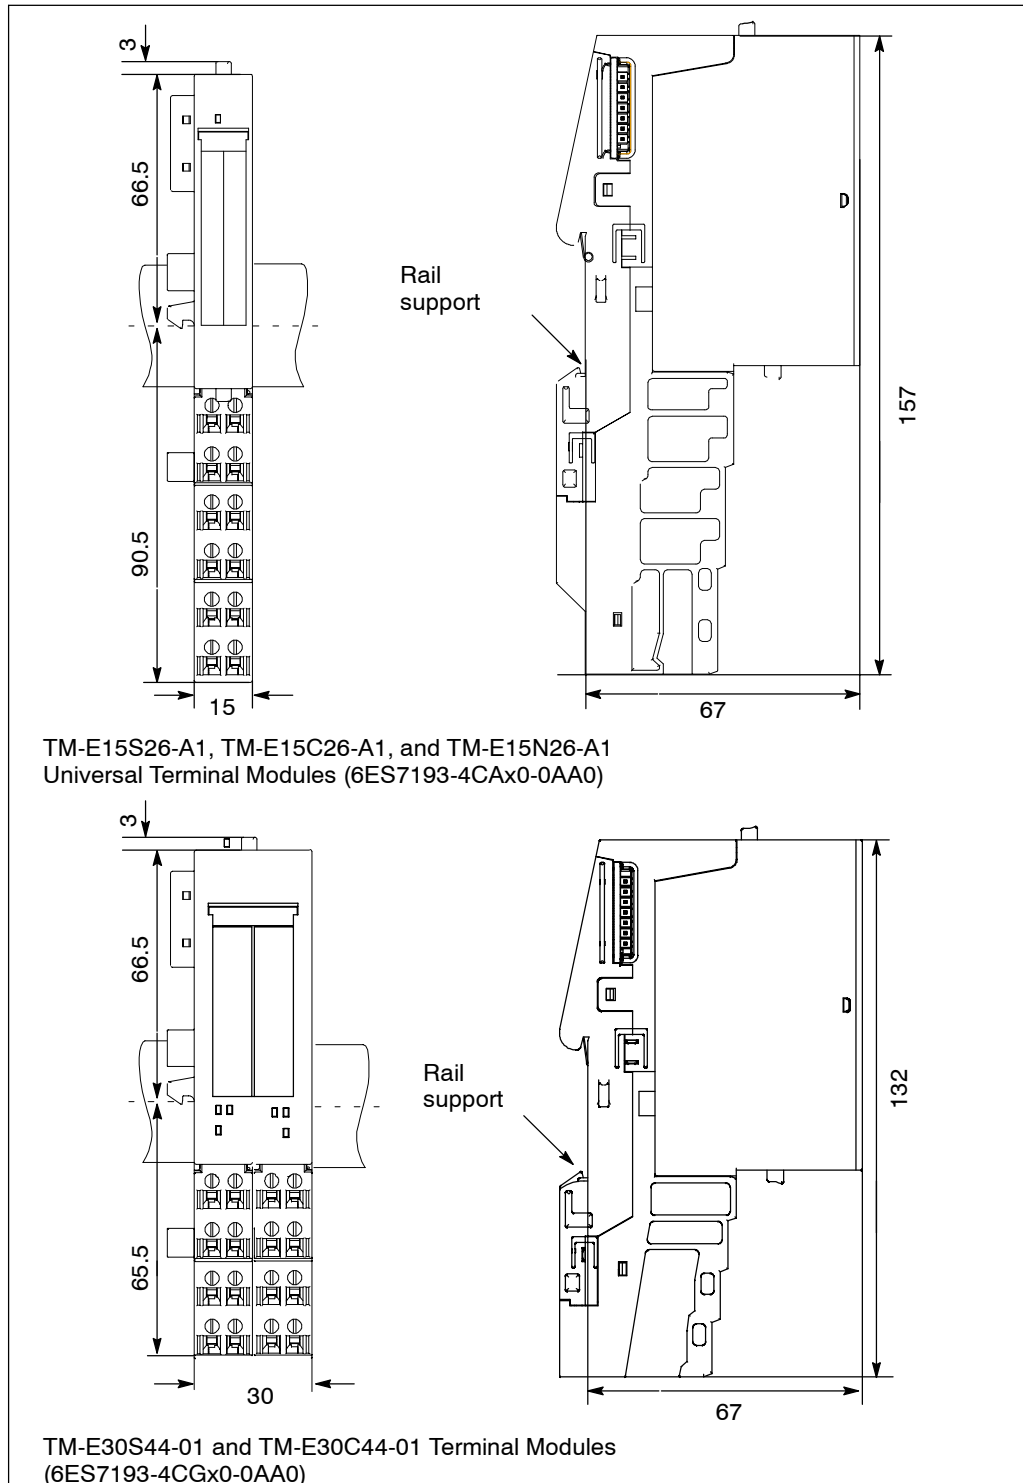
Dimensioned Drawing of Terminal Modules (Screw-Type/Spring Terminals) with an Electronic Module Inserted
